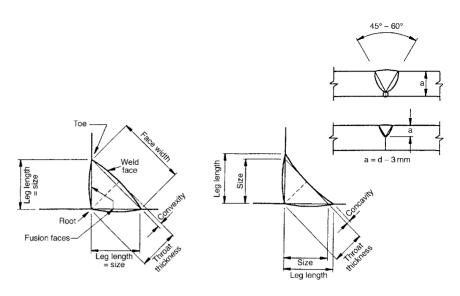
Fillet and groove welds—weld profile terminology
